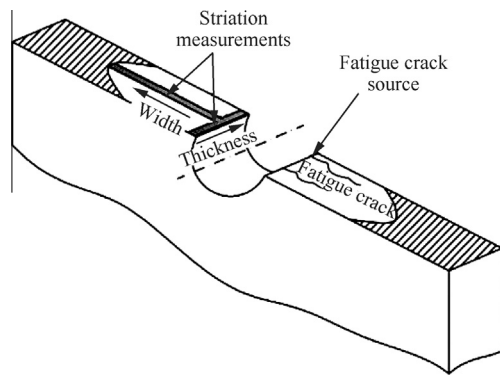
Fractography analysis of a metal fatigue specimen.<sup>59</sup>
